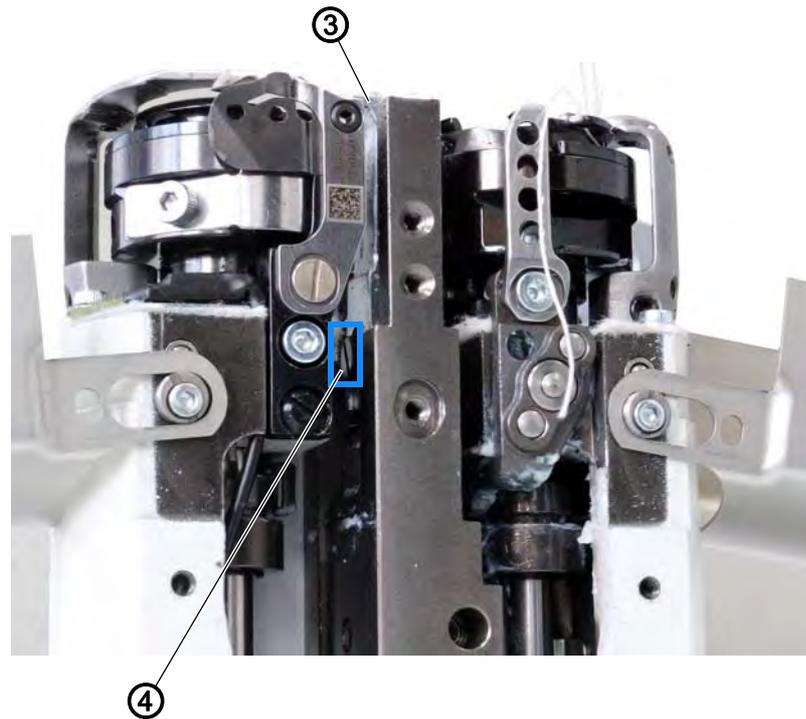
Assembling and disassembling the feed dog in a 1-needle machine (3)
